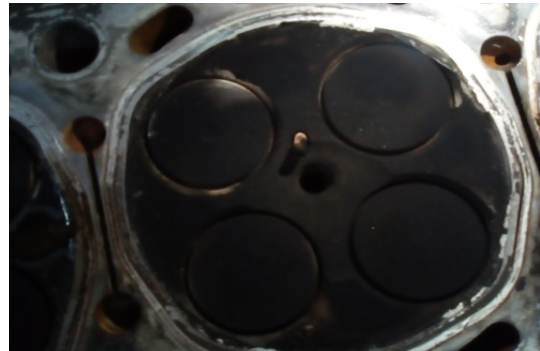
Motor engine IVECO F1CE0481HC003 - view 3 of the lower part of the cylinder head above the third cylinder.
